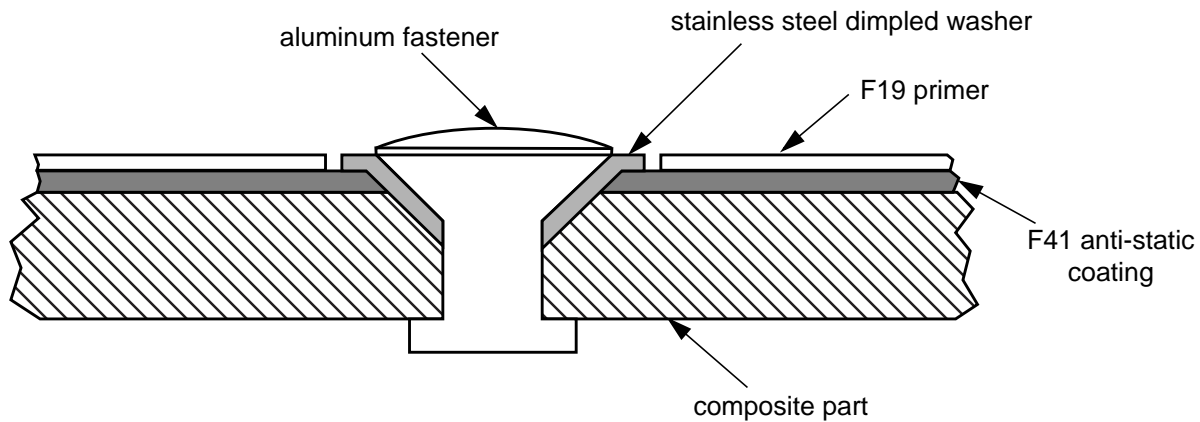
Installation of Fastener and Stainless Steel Dimpled Washer
